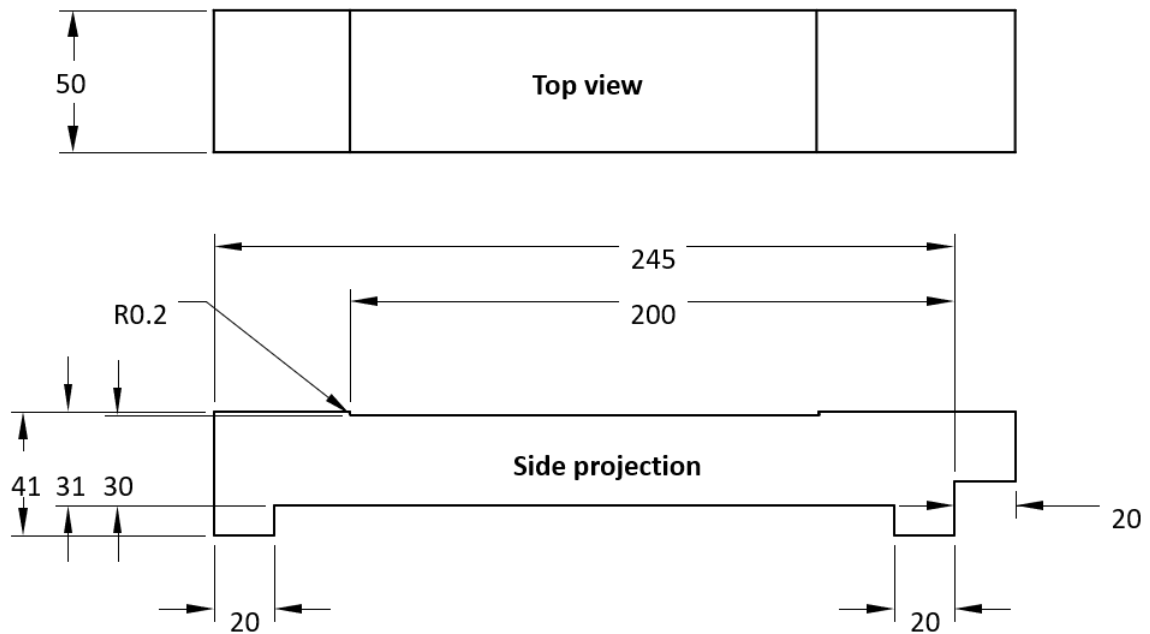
A schematic showing the dimensions of EN24 steel substrate (units shown in millimetres)
